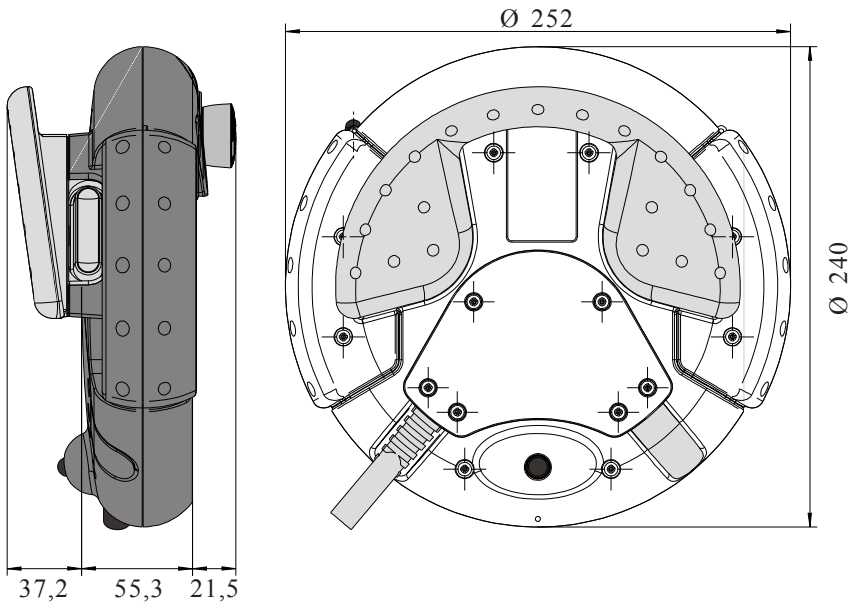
Dimensions of the hand-held terminal VCH 08.1
